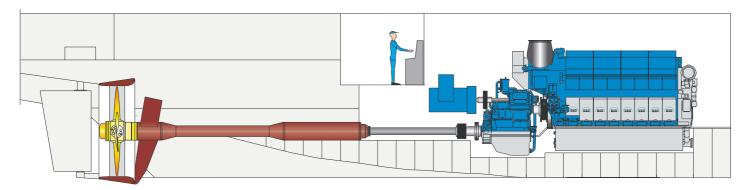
Propeller equipment type VBS-ODG (8L27/38 engine, AMG28EV reduction gear, VBS860 propeller)
